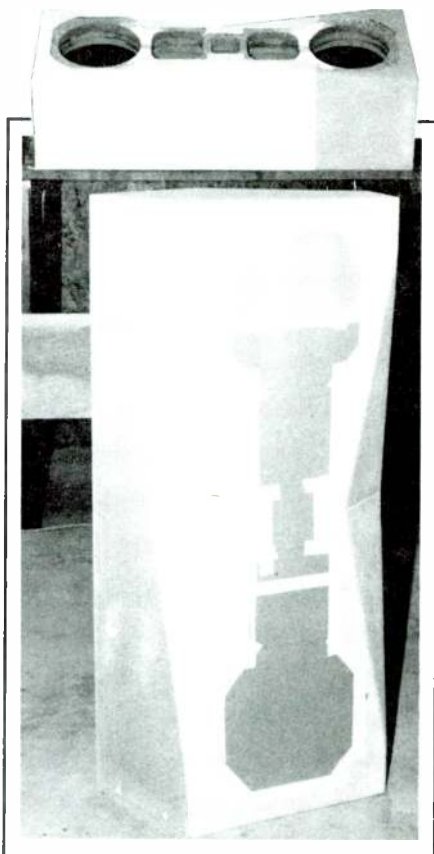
Enclosure covered with sheet hot-melt adhesive.
